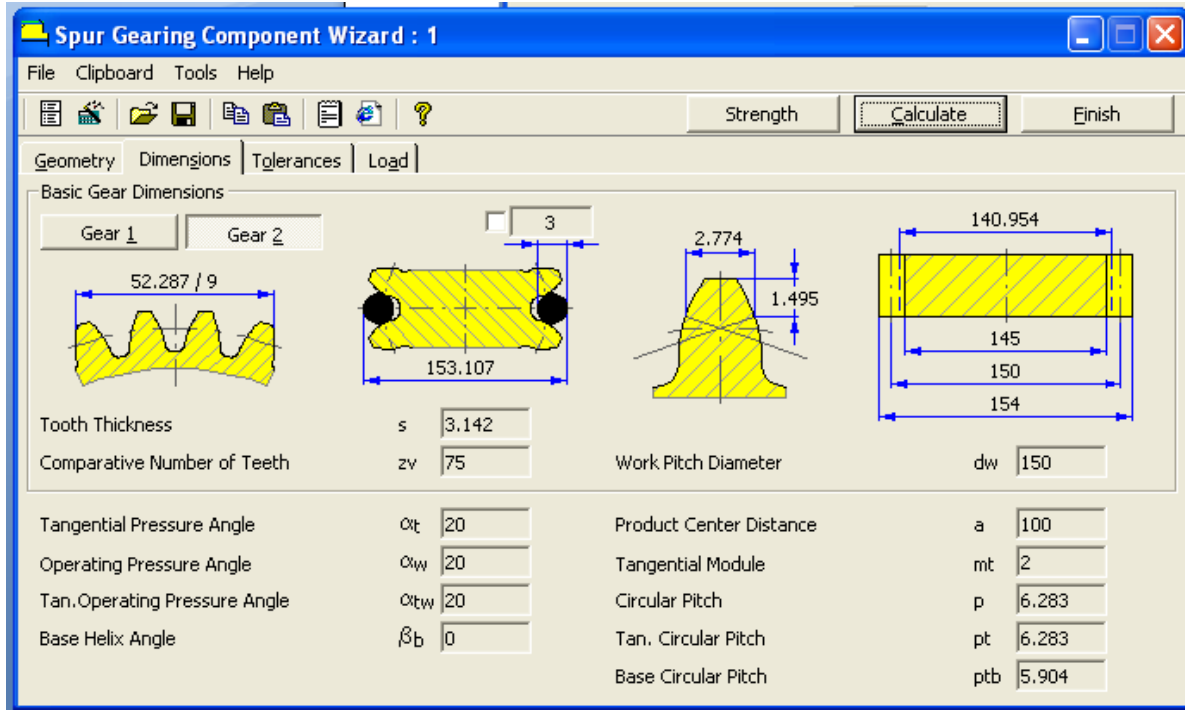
Technical information (basic pinion dimension) of the pinions when the gear designed by the mech soft.
